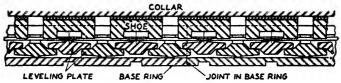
Development of equalizing thrust bearing showing leveling plates.
